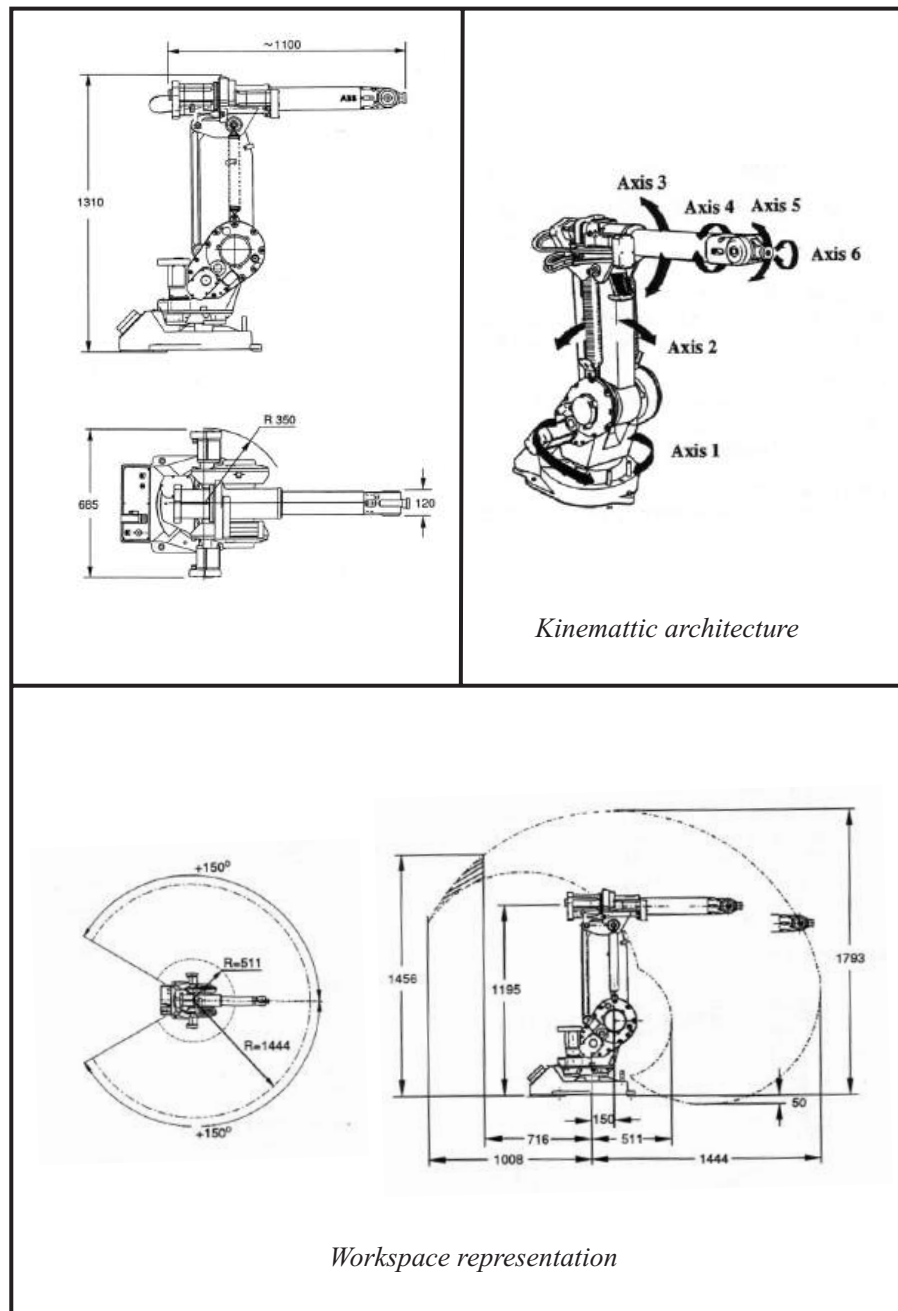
Industrial robot ASEA-IRB 1400 Geometric configuration
